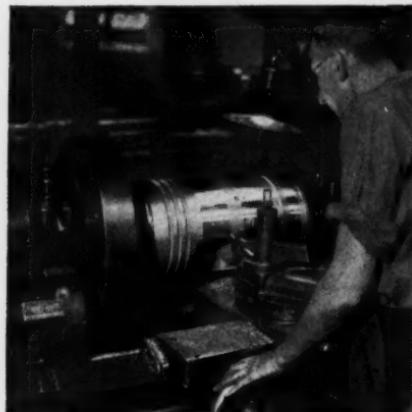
Spraying molten babbitt onto a piston to form babbitt thrust surfaces.
